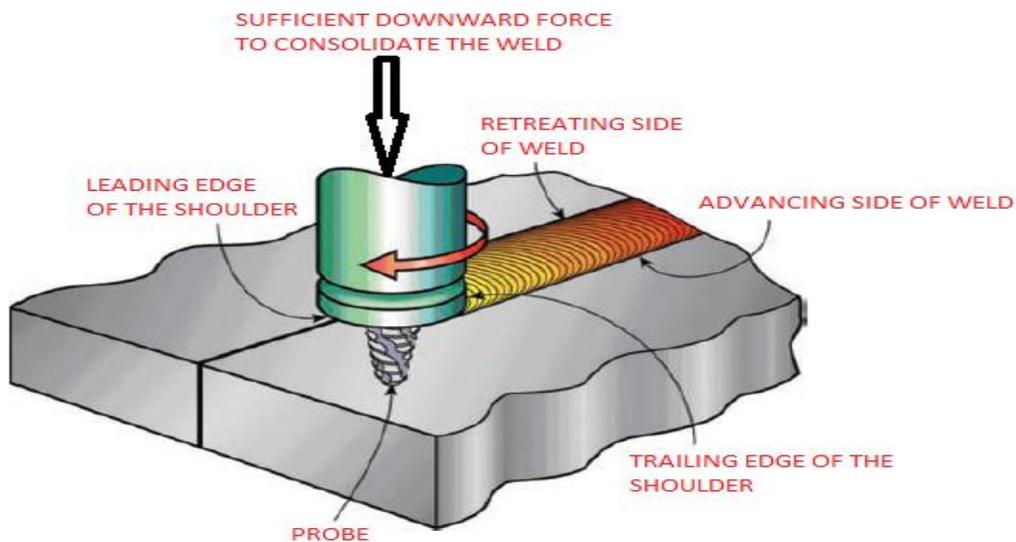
Schematic diagram of friction stir welding (FSW) [59].
